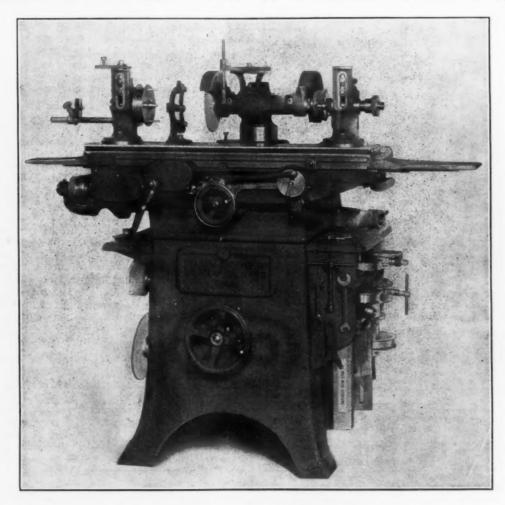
A New Machine for Grinding Spur Gear Cutting Hobs, Made by the Walker Grinder Company, Worcester, Mass.
